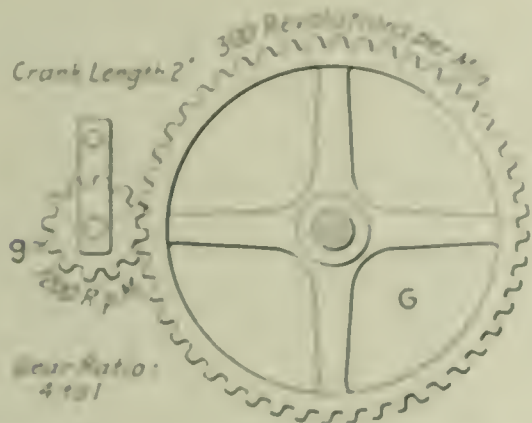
GEARING OF THE SHORT-STROKE ENGINE
